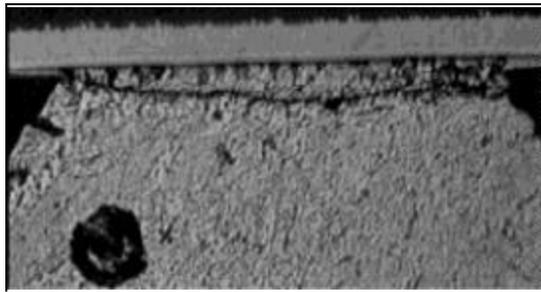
Cross-sectional Image of Failed Package D Assembly (UF1)
